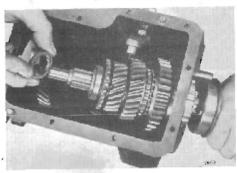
Assembling the thrust washer with its scrolled face towards the gears
